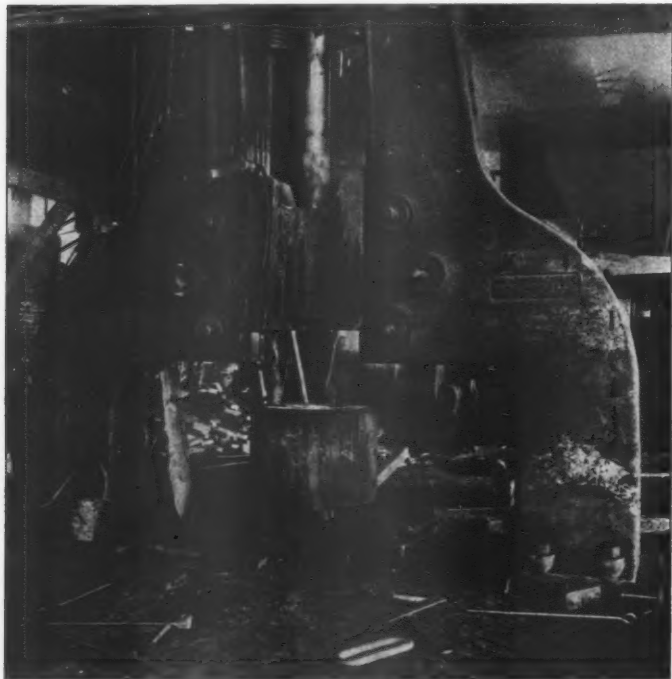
LARGE STEAM HAMMER WITH WELDED LEG
